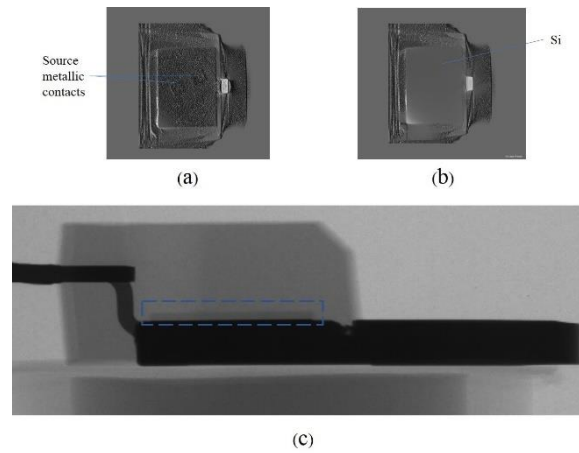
Scan Power MOSFET on horizontal position:(a) 3D show the top view clamping to the external package and sour metallic contacts, (b) Si-layer shows the top view a flat section that does not evidence details or defect and (c) projection of Power MOSFET on horizontal position also show on blue dash rectangle the region of interest.
